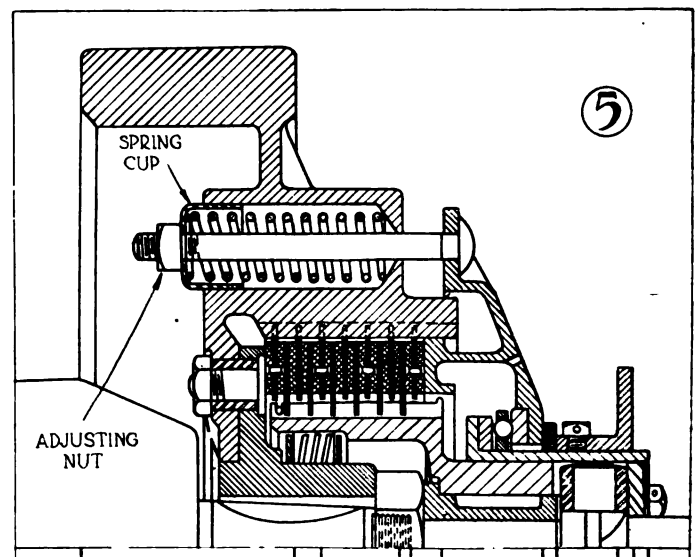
Clutch adjustments. Adjusting nut adjusts clutch tension, but should not allow spring cup to come out
